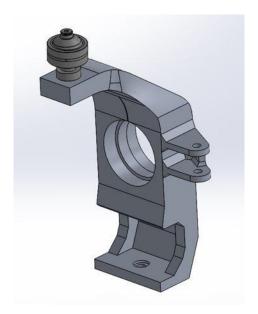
Front Driver Knuckle With Upper Control Arm Mounting Interface
